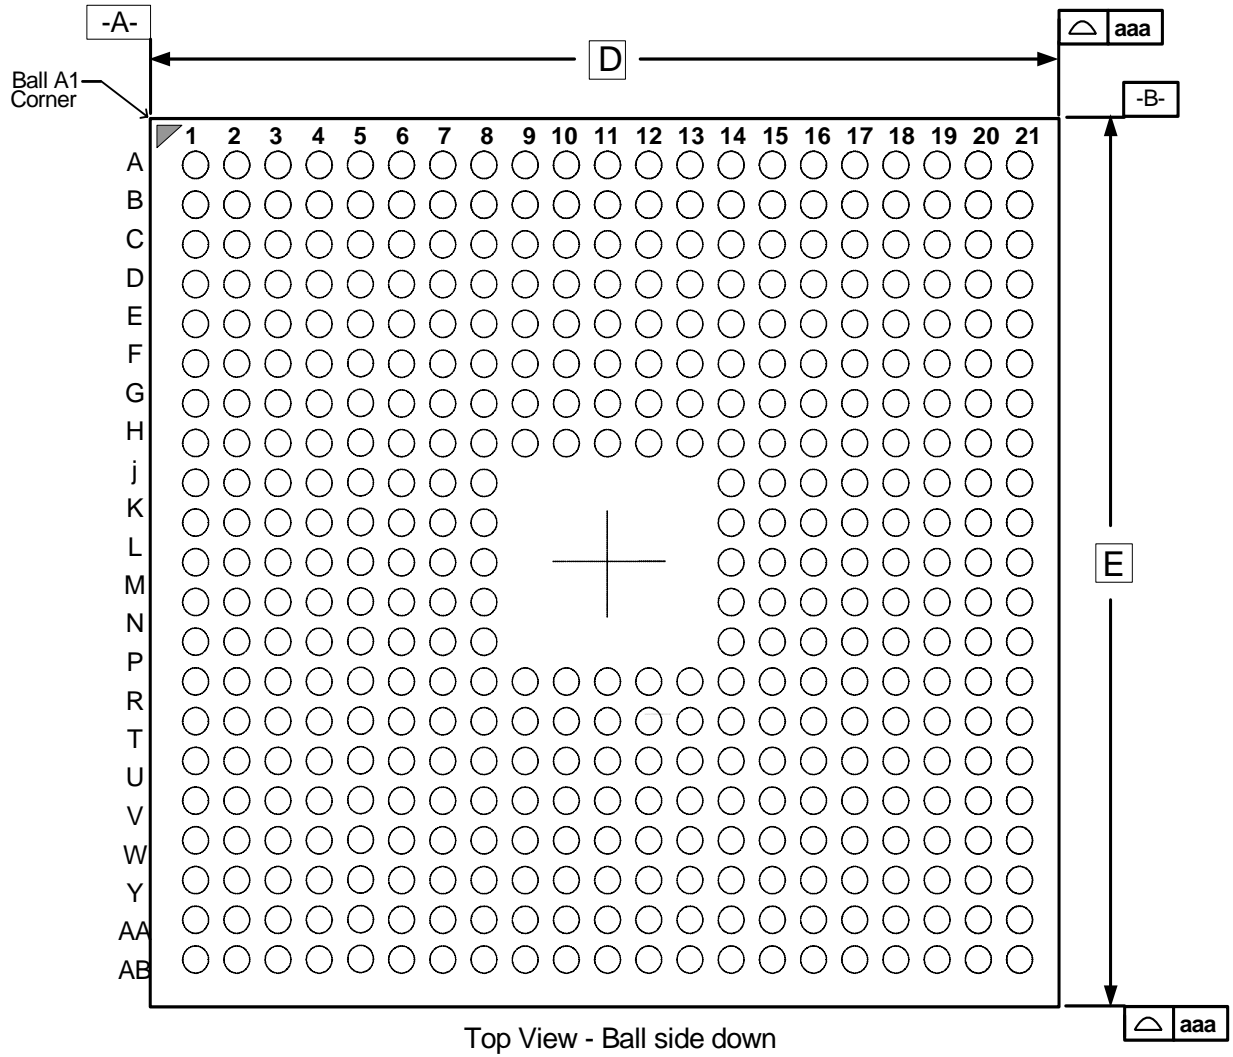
PXA301 Processor and PXA311 Processor 15-mm² MCP Package, Bottom View
